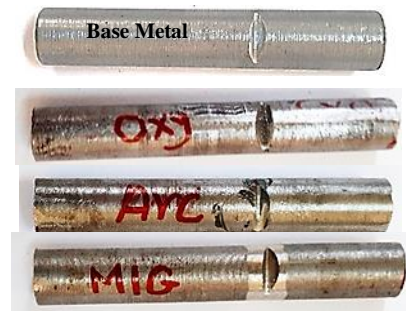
Notched specimens of the base metal and welded joints
